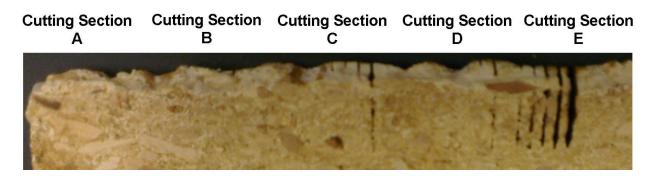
Bulk cutting test results - lower testing surface showing partial penetration
